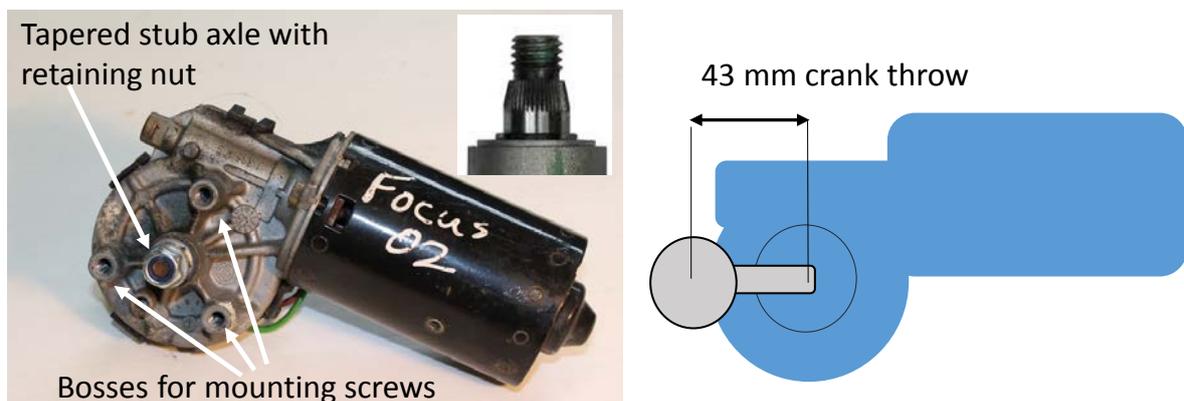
Typical Bosch Wiper Motor – Note mounting screw bosses and crank/spigot arrangement
